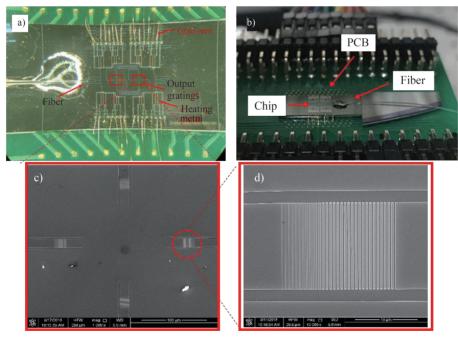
(a) The microscope photograph of the integrated chip on PCB. Gold wires link the chip circuit and the external circuit, (b) Inclined surface fiber is packaged to the chip using UV adhesives, (c) and (d) Scanning electron microscope (SEM) photographs of the integrated chip
